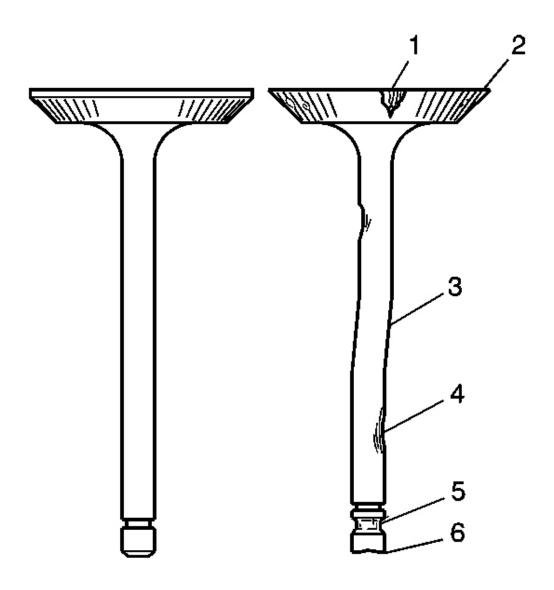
Identifying Inspection Points For Valves Damage Courtesy of GENERAL MOTORS CORP.
